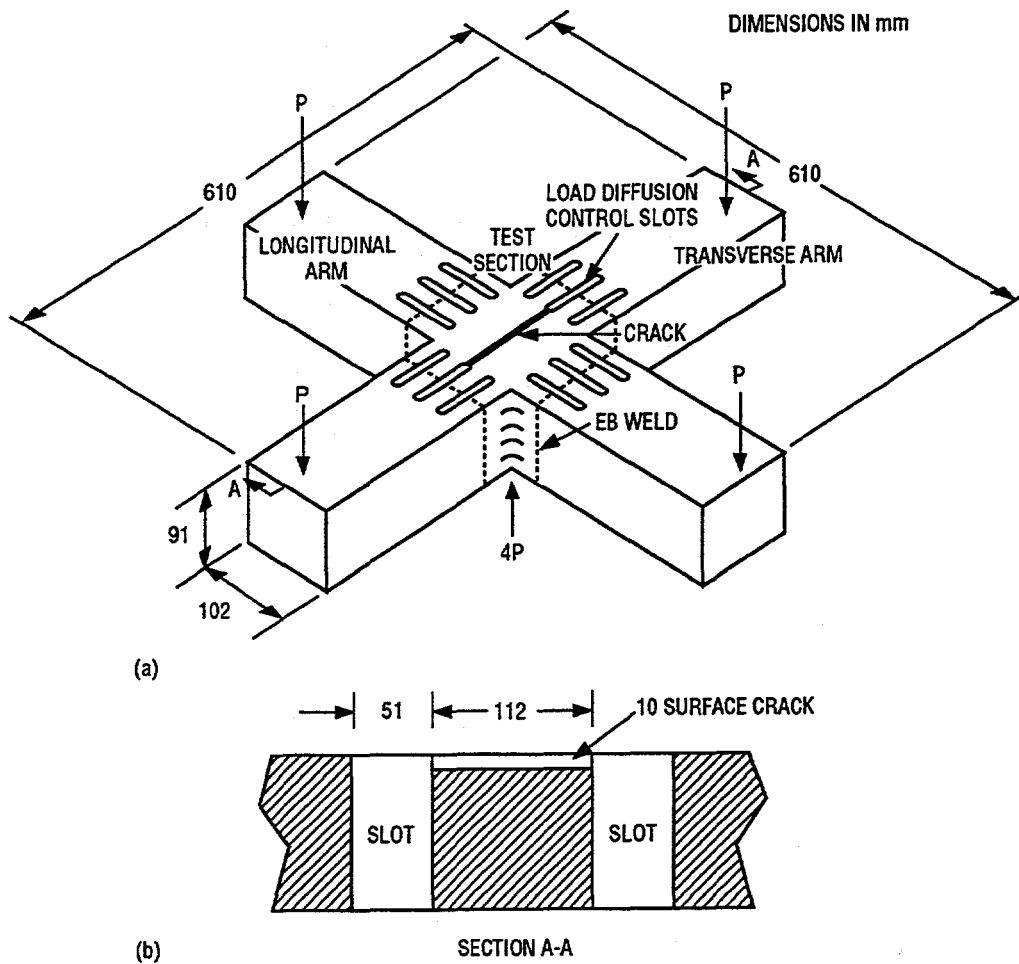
Cruciform bend specimen (BB-1 through -5; ORNL)
